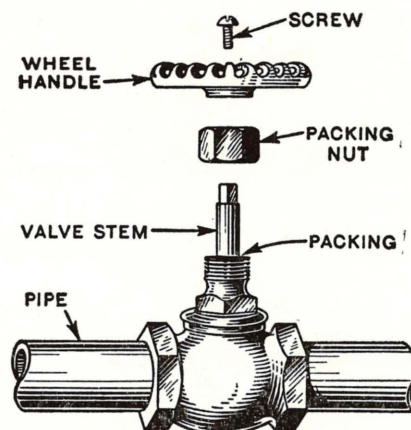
The packing may be replaced in a compression valve by removing the packing nut
